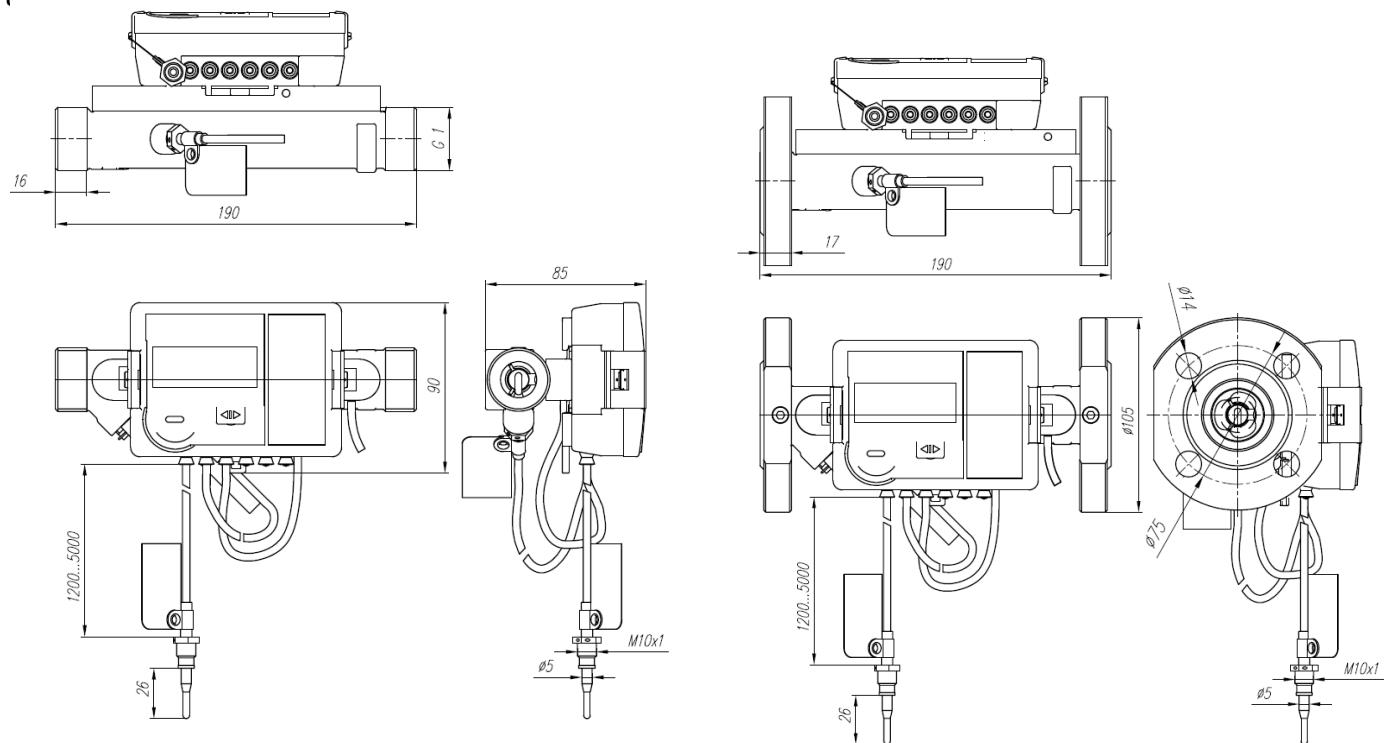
Sizes and dimensions of heat meter IFX-M4-03
